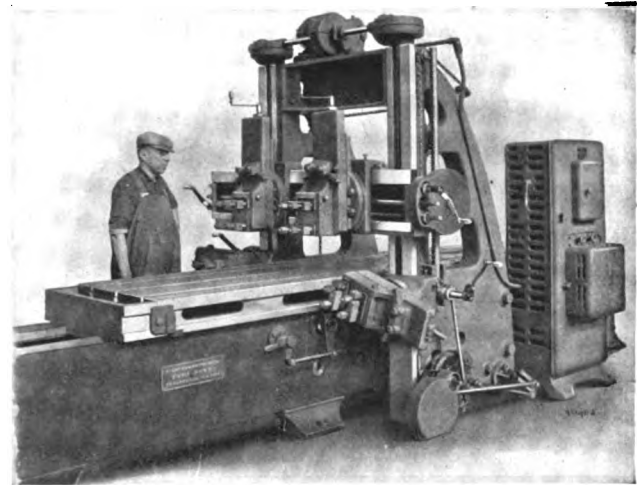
Heavy 42-Inch (1067 mm.) Planer with Two Rail Heads and Two Side Heads
